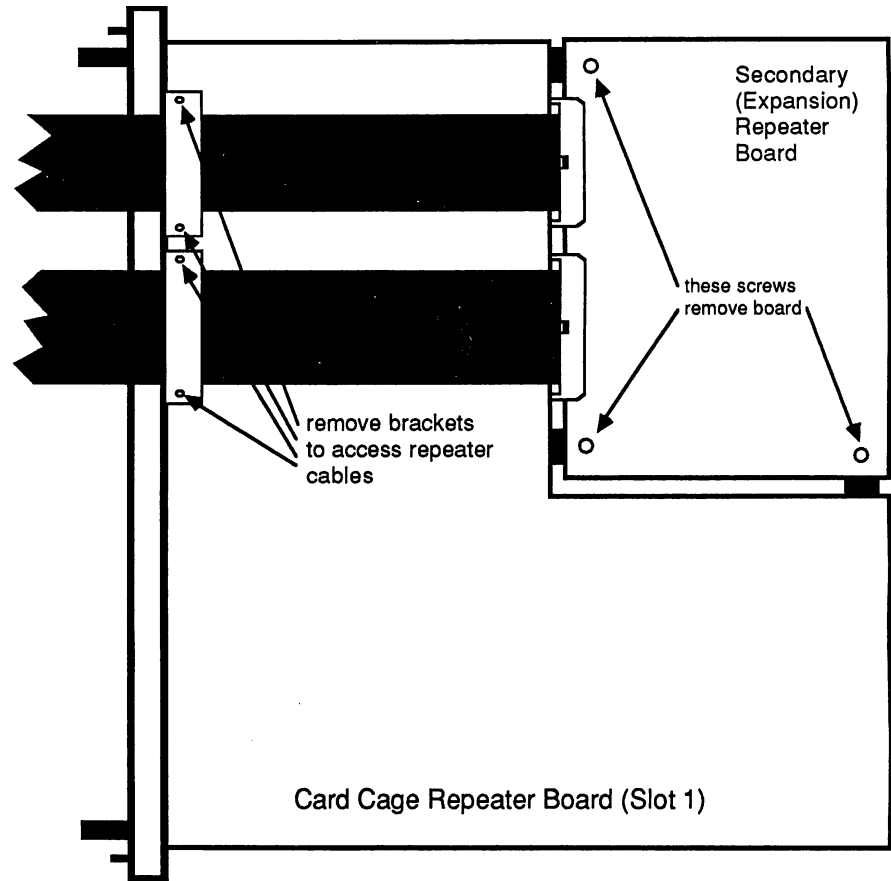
Removing the Repeater cables from the VME Card Cage
